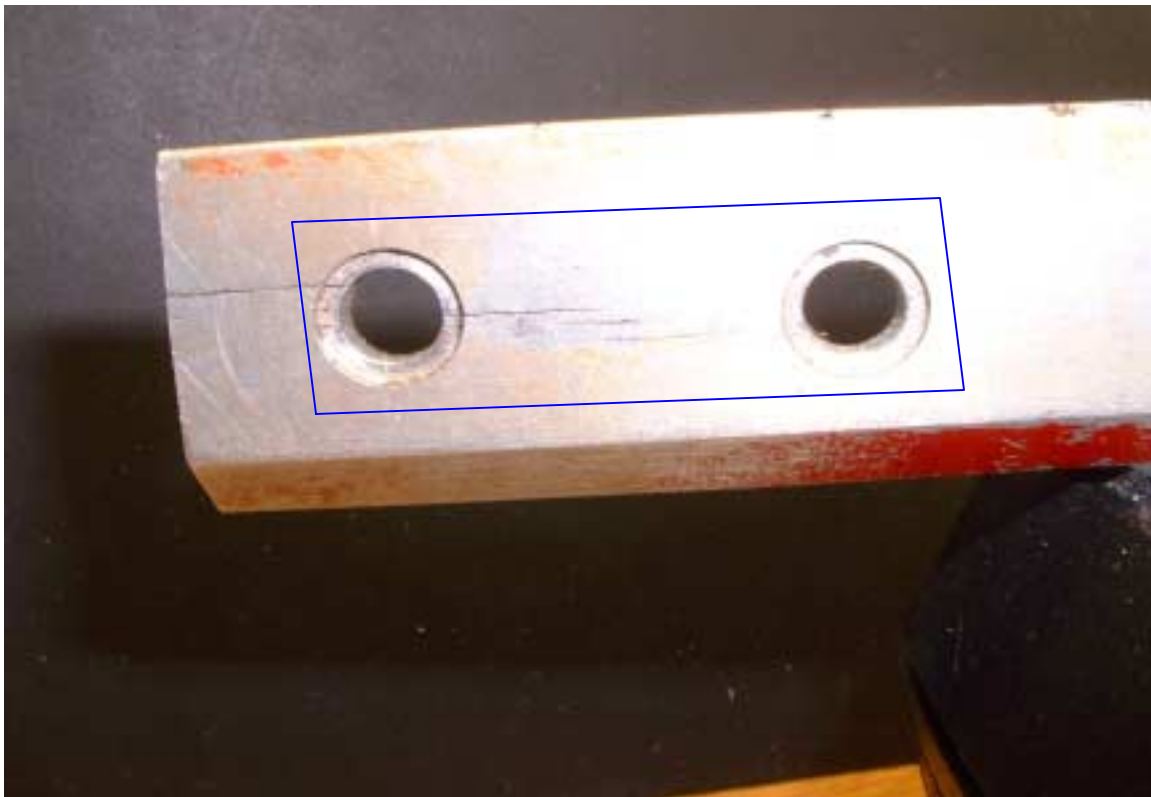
Photograph showing cracks around fastener hole of Sample #3 – magnification about 2x actual size.
